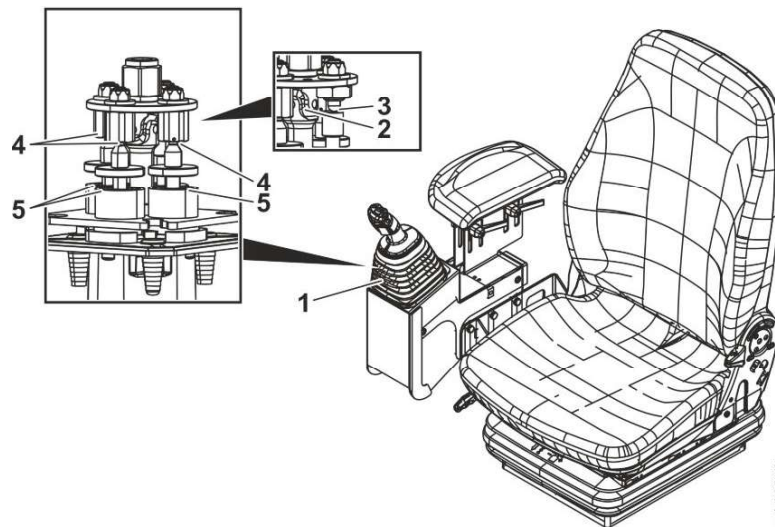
Lubricating the solenoids, universal joints and tappets on the pilot control unit
